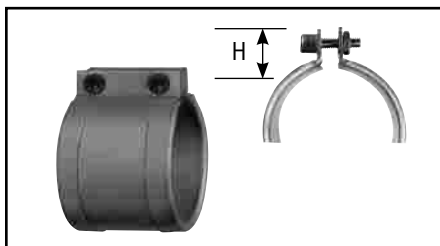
Mounting Flange — a secondary means for mounting where a built-in method is preferred. With 5/16" Socket Head bolt. Consult factory for lead wire exit when used with Type A leads.
